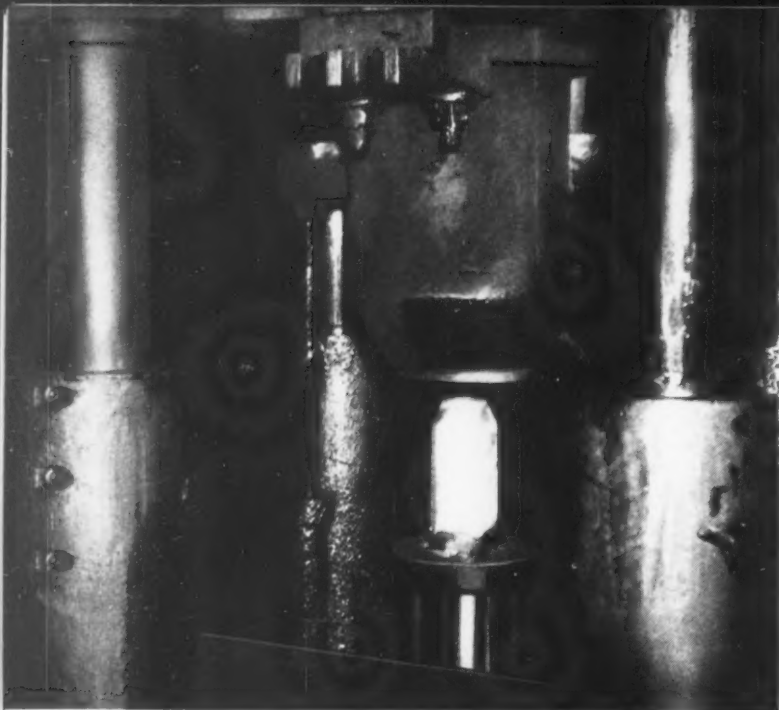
Two Sets of Rollers Used in a Horizontal Hydraulic Press for Drawing the Shells to the Required Length and Reducing Their Diameter
